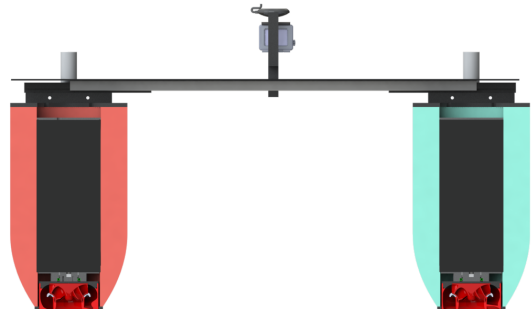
SWAMP section with the view of the Pump-Jet Module
